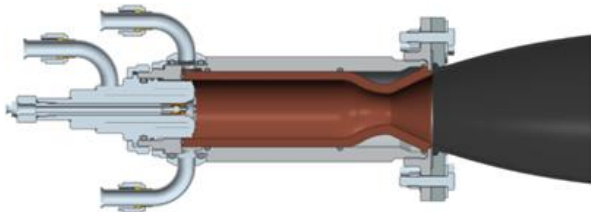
1.2K-lbf thruster with additively-manufactured liner and composite nozzle extension
